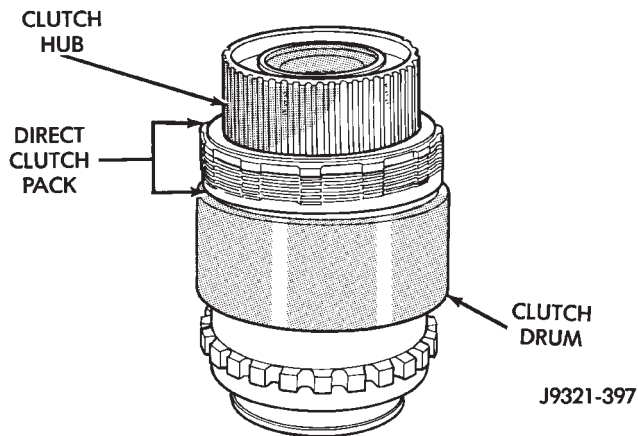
Direct Clutch Pack And Clutch Hub Installation
